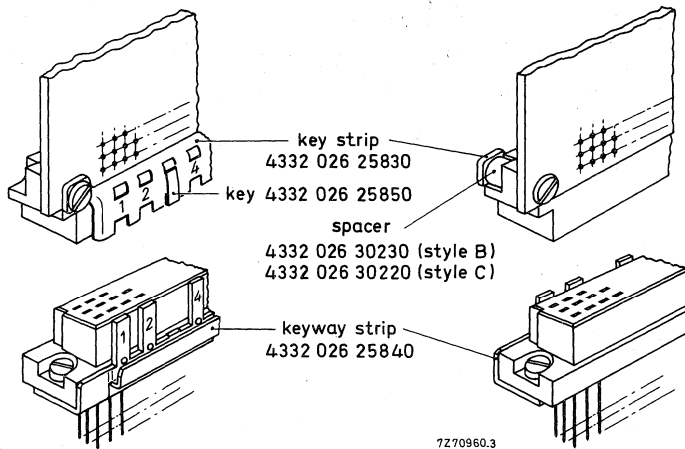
Coding parts; key strip mounted to solder side of printed board.
